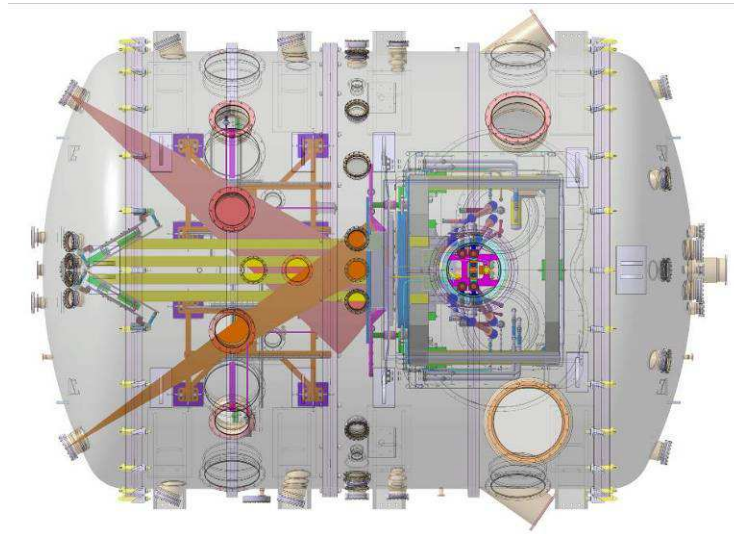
View of SPIDER vessel highlighting the port-holes dedicated to GG and ED inspection and to BES.
